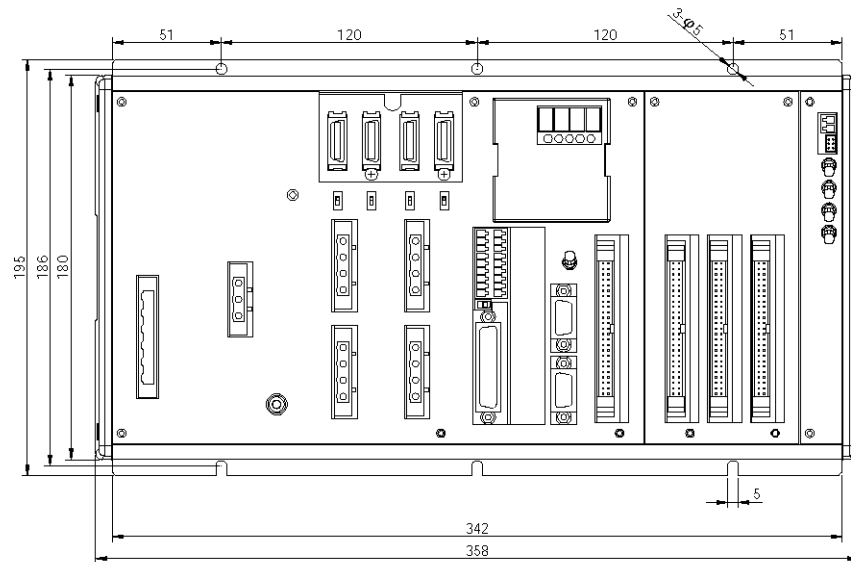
P Type 4 axis Controller with Expansion I / O Board + Absolute Brake Unit
